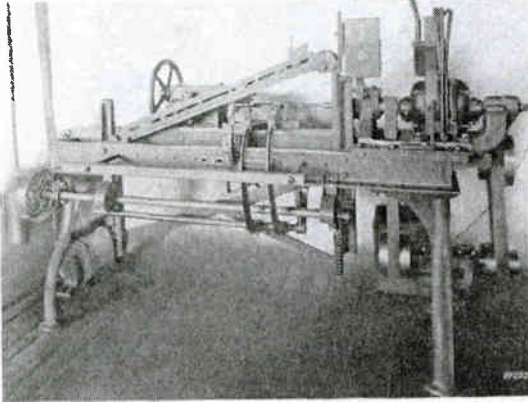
3 H.P. Induction Motor mounted on Head Stock of Back Knife Gouge Lathe
